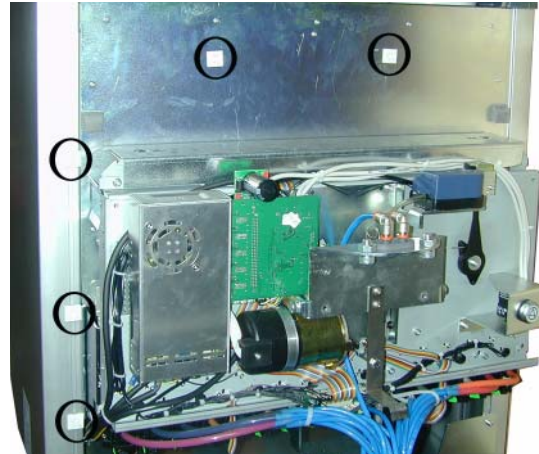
Remove the front casing and panel. Attach 5 adhesive cable tie mounts (circled in the picture) to the machine.
